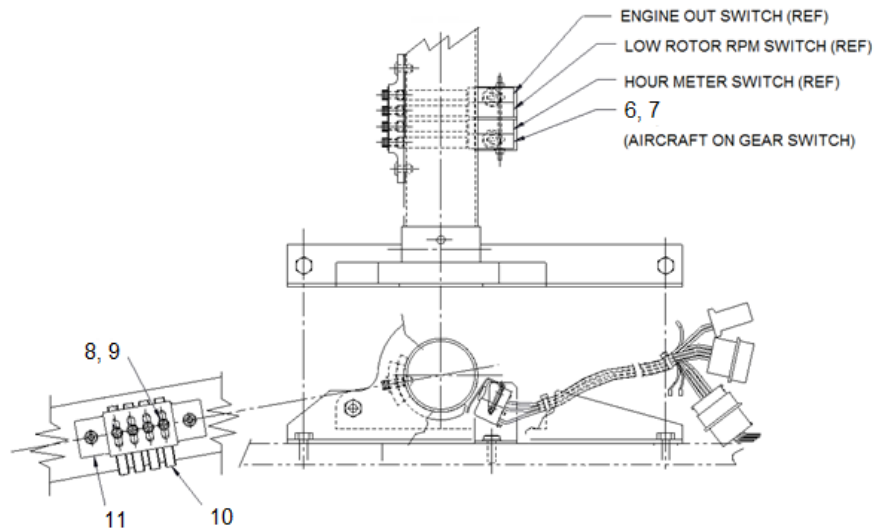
GTN 650/750 Installation – Aircraft on Ground Switch
